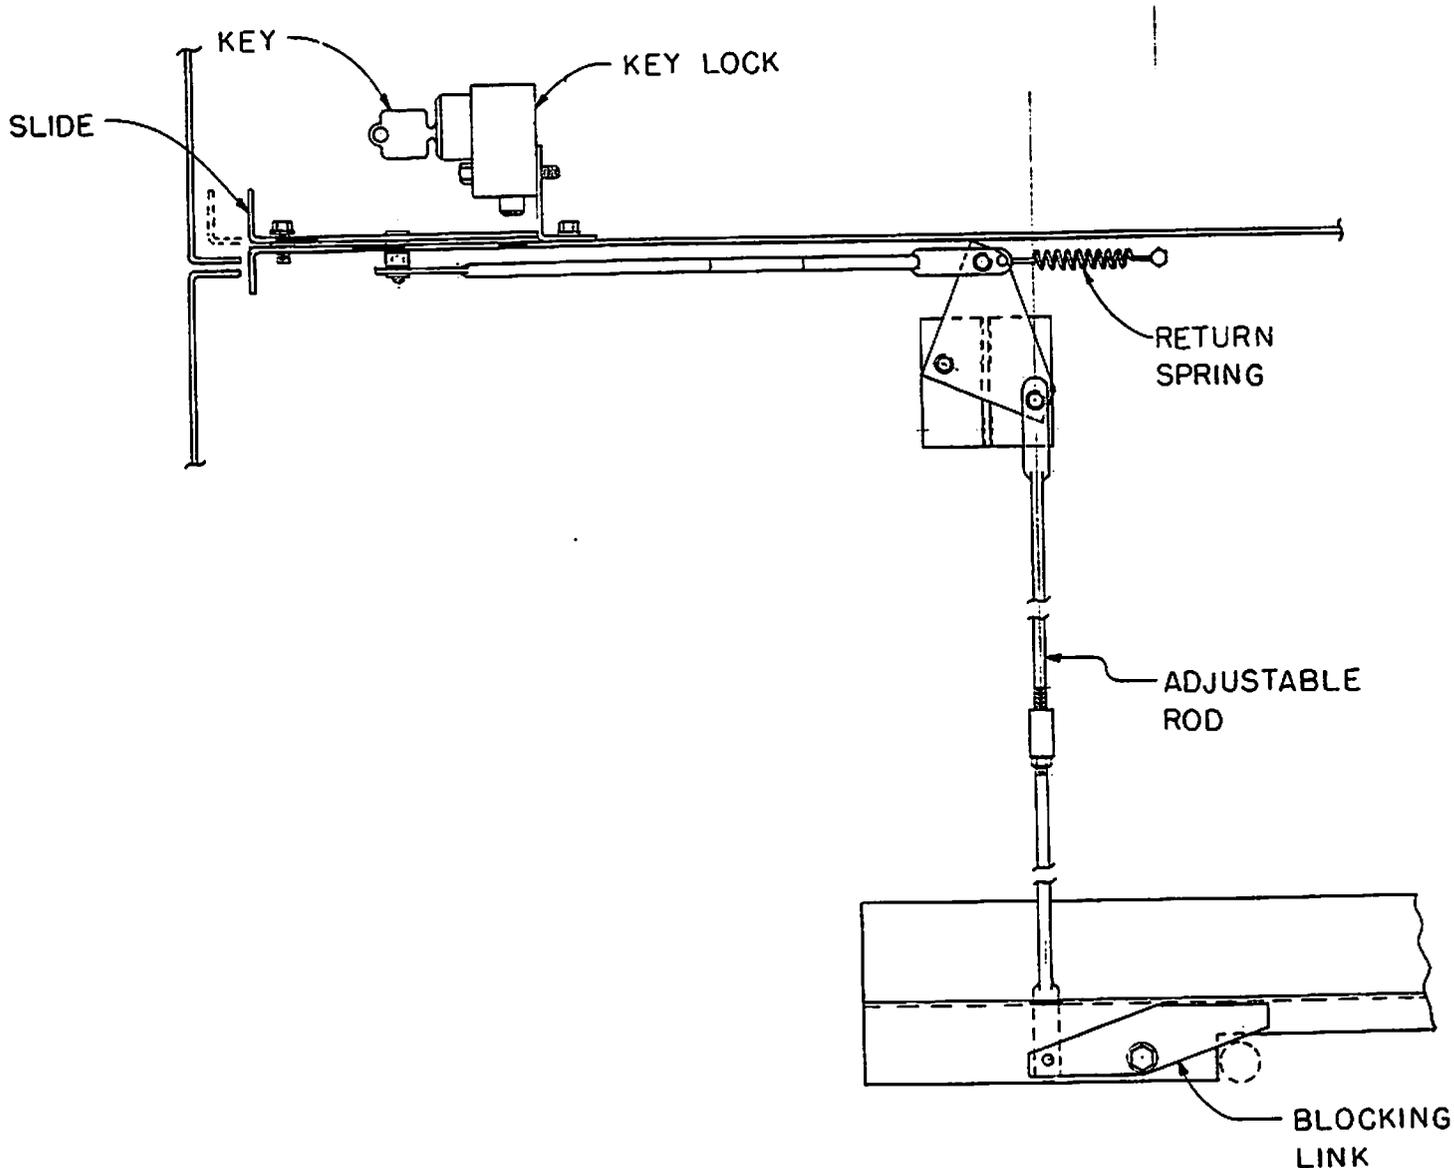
(0673D0515-182) Breaker Key Lock 4.76 KV
